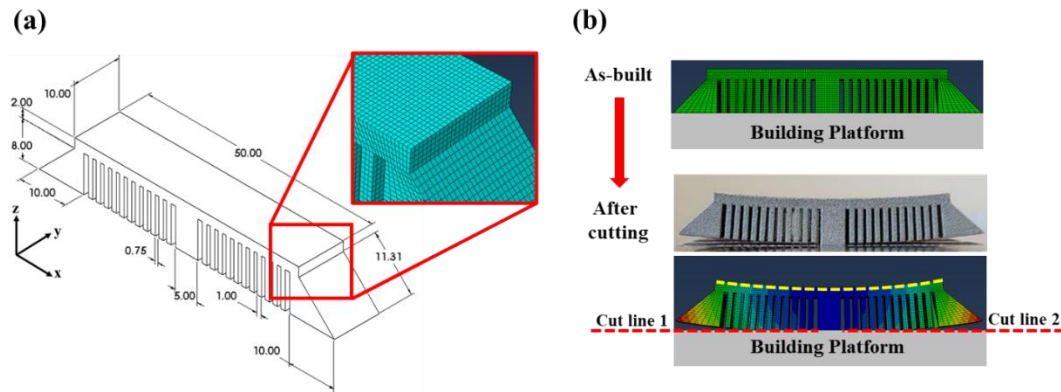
(a) cantilever dimensions (in mm) and a brief view of the meshing approach, and (b) the view of the part before and after cutting the side supports.
